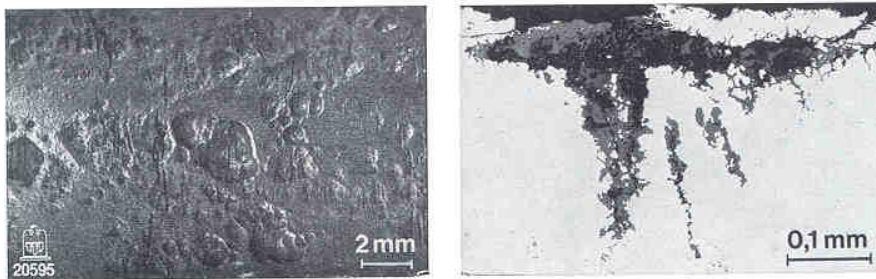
Low-cycle elongation fatigue cracks in an oil cooler tube (CuZn20Al) originating from corrosion pitting.
